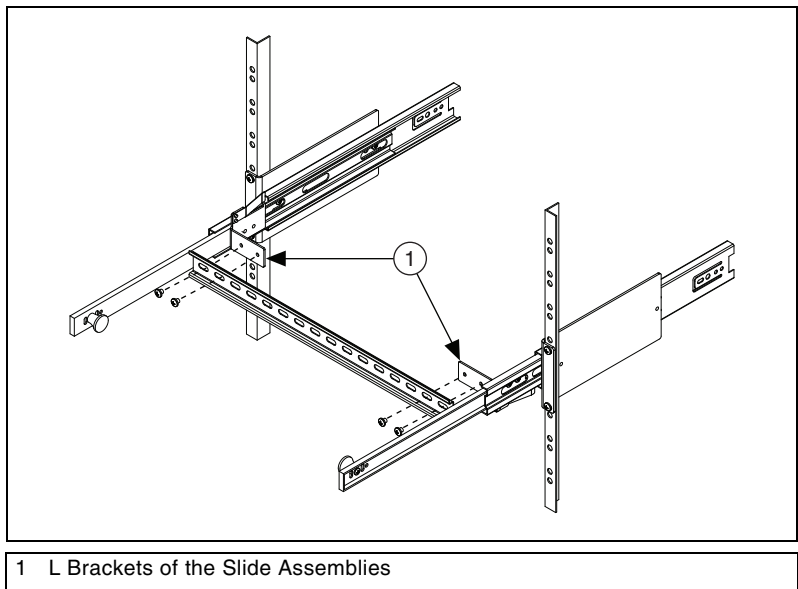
Attaching the Slide Assemblies to a Standard 19-inch Rack
